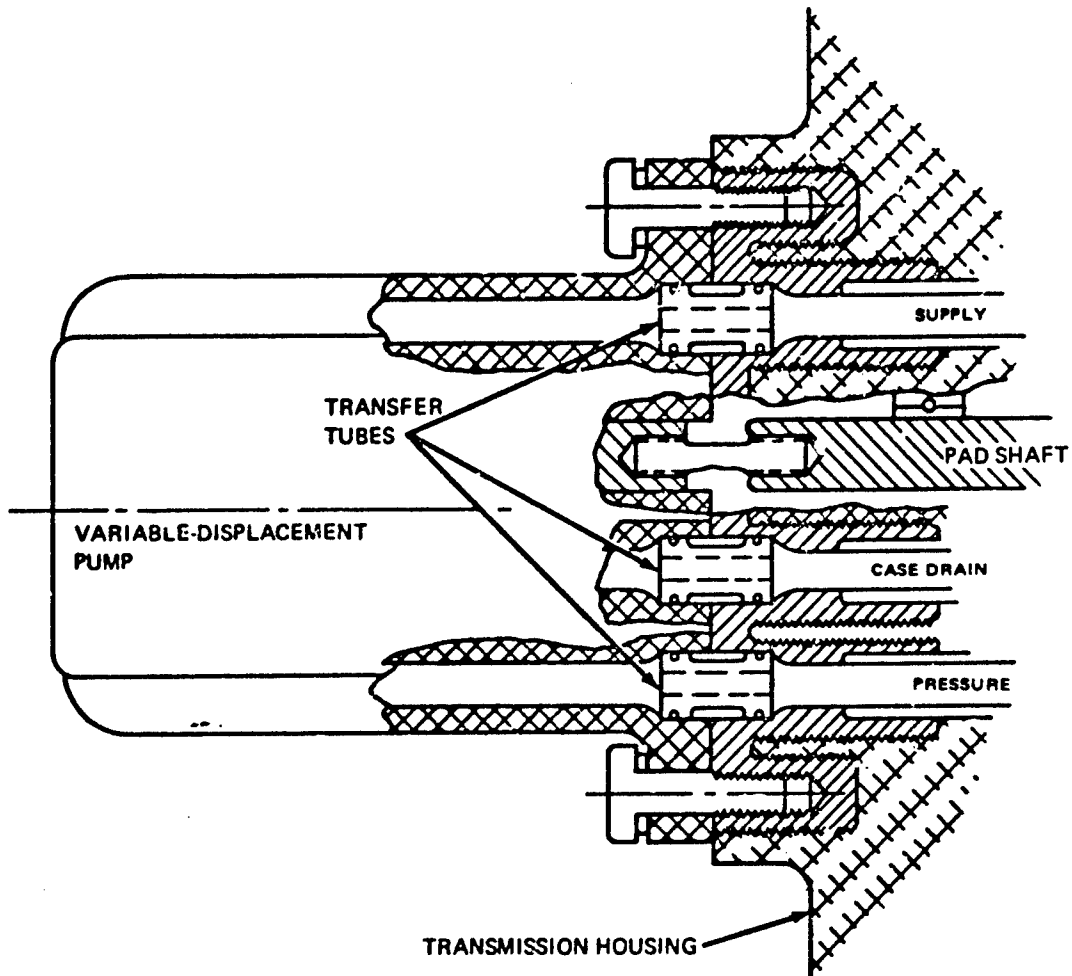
Example of Hydraulic Pump Mounted on Cored Transmission.
